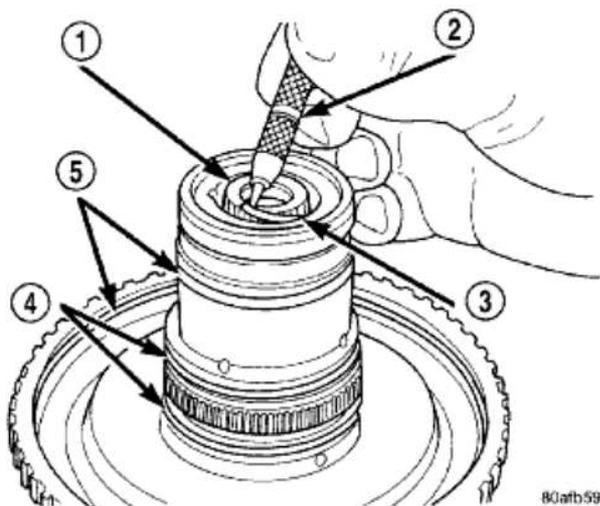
Removing Input Shaft-To-Input Clutch Hub Snap Ring
